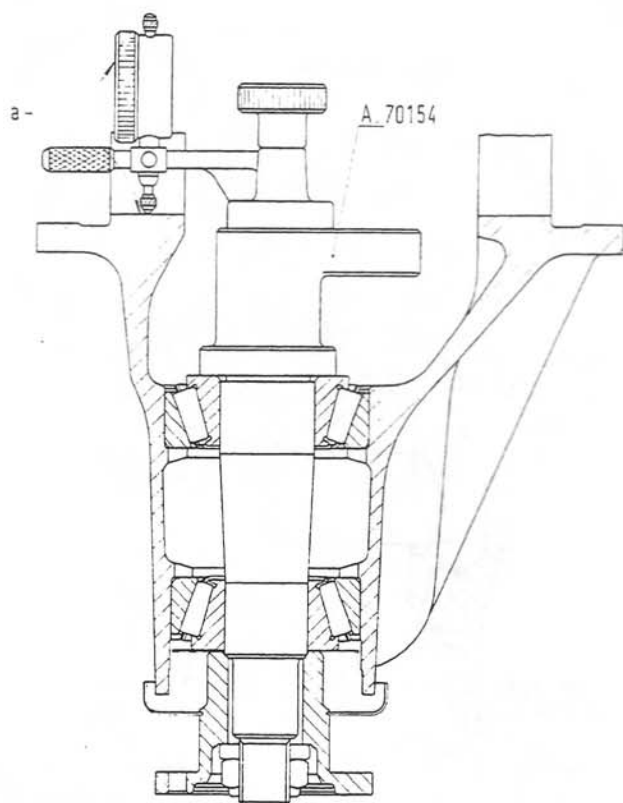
Diagrammatic view showing how dummy pinion A. 70154 and dial indicator should be fitted to determine drive pinion rear bearing thrust washer thickness.
